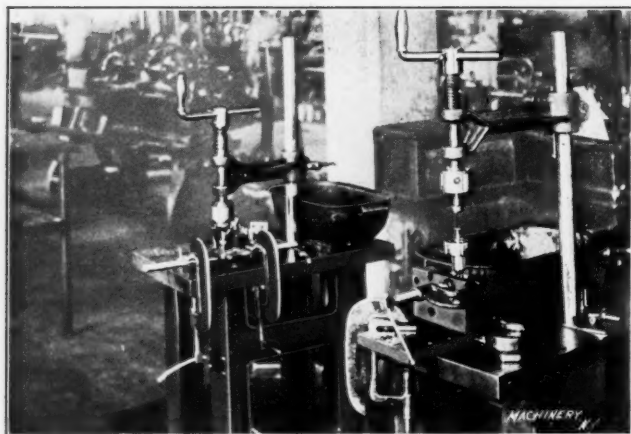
Small Hand-operated Machines for Re-cutting Cap-screws or Re-tapping Nuts
